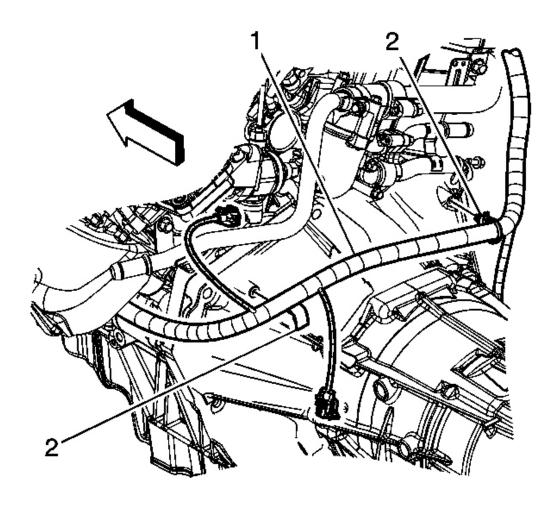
View Of Vent Hose Assembly Courtesy of GENERAL MOTORS CORP.
